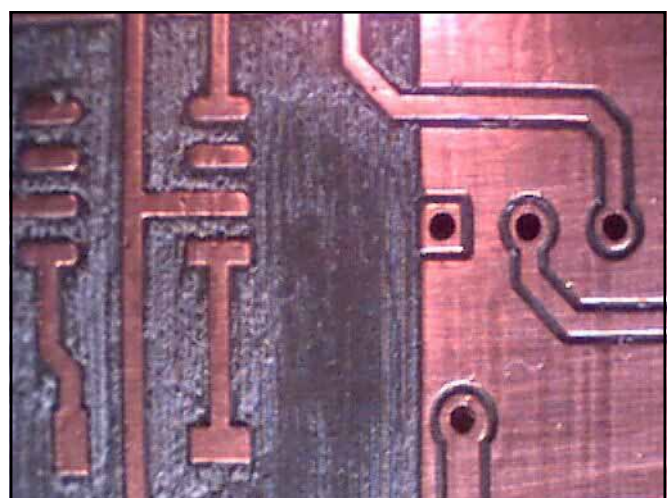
Here is a close-up view of a milled prototype board. The PC-board milling software accepts standard Gerber format data that is produced by all PC board-layout programs. The software then determines the path for the milling tool to isolate the traces on the board. The only differences between this and a production PC board are the lack of plated through holes and the somewhat more difficult task soldering the board.
